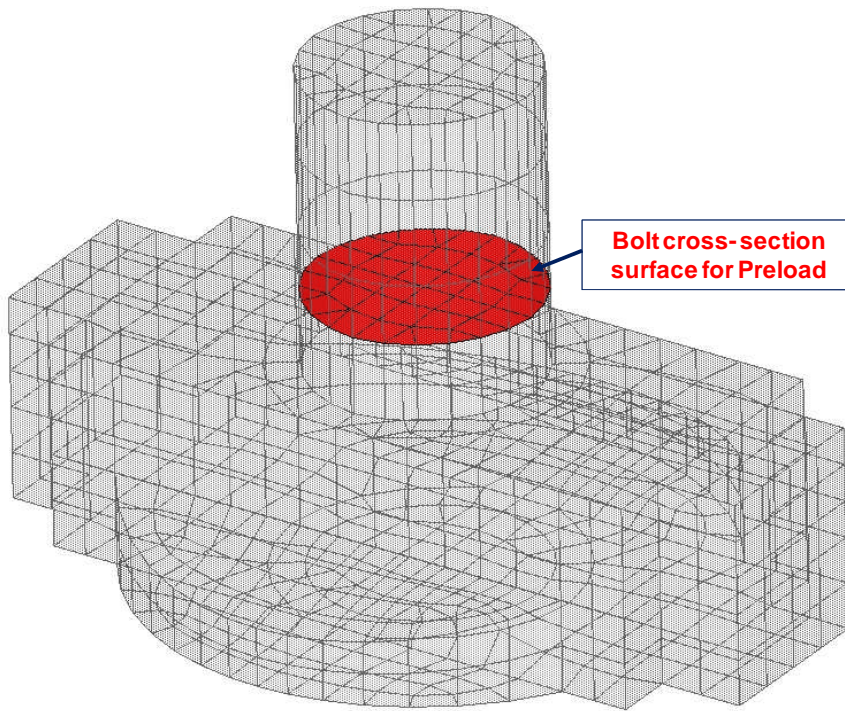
Internal Cross-Section over which Bolt-Preload would be applied [29]
